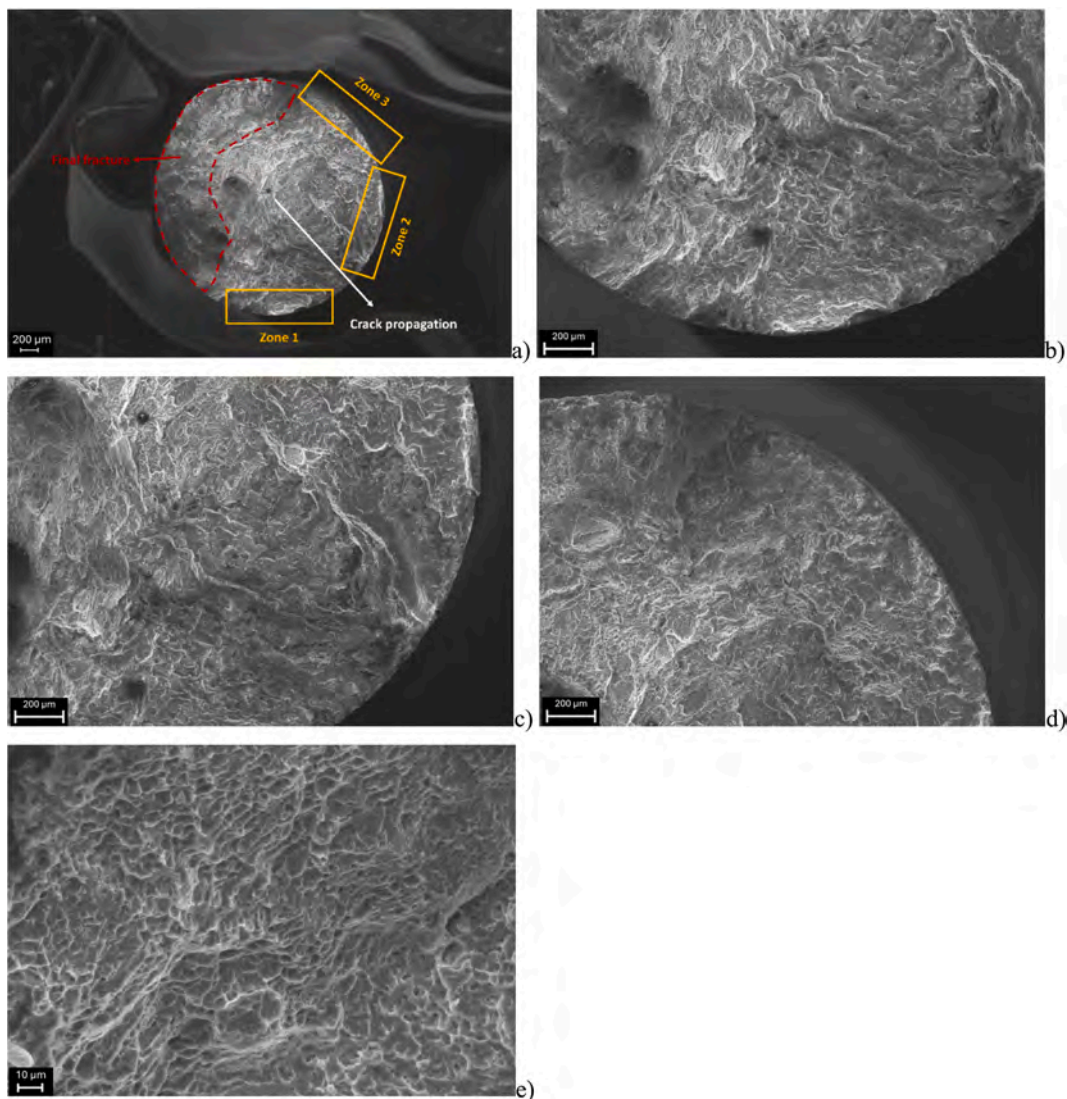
Fracture surface analysis of specimen HCF-AB2 – (a) fracture surface, (b) magnification of Defect 1 – some radial marks are visible too, (c) propagation zone, (d) fracture zone.
